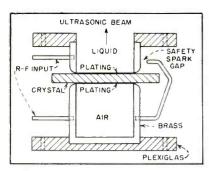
Cross-sectional view of improved crystal holder, showing design details and materials used
